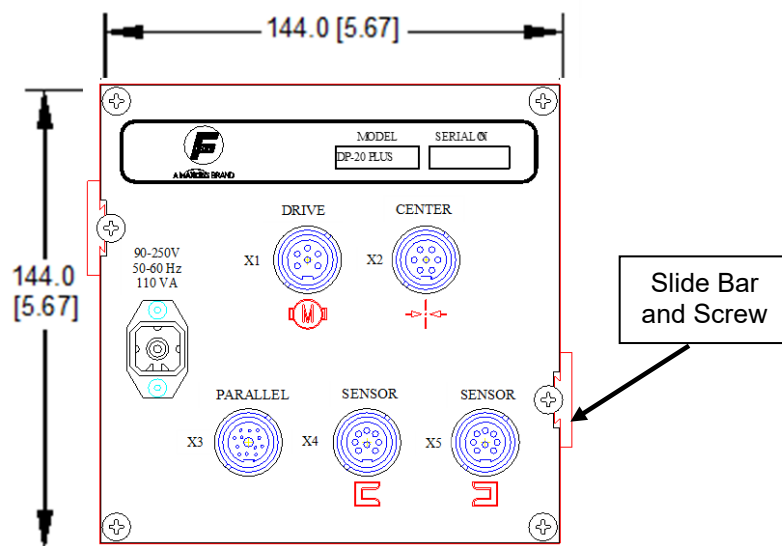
DP-20 PLUS Rear View (Panel Mount)
